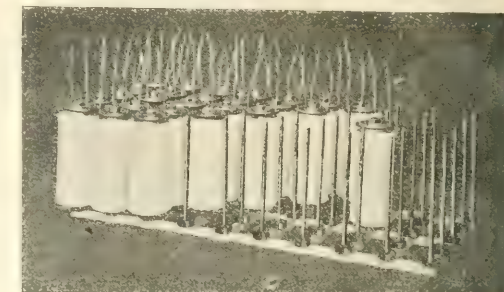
CONDENSER UNITS ASSEMBLED.
